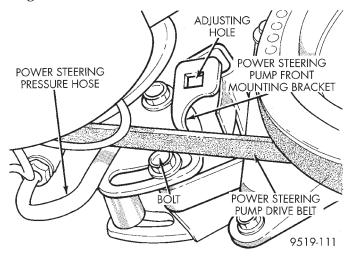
Power Steering Pump Front Mounting Bracket Adjusting Hole
